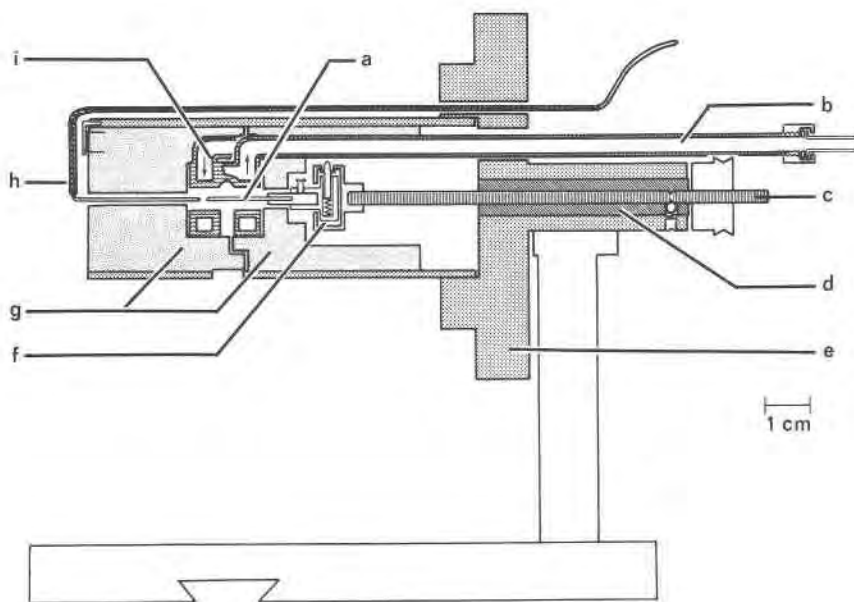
Cross-section of the assembled camera without the cassette: (a) specimen; (b) copper tubing for refrigerant; (c) retractable specimen shaft; (d) brass bushing; (e) machined nylon disk; (f) sample-centering chuck; (g) two-part machined foam insulation; (h) thermocouple wire; (i) copper cooling capsule.
